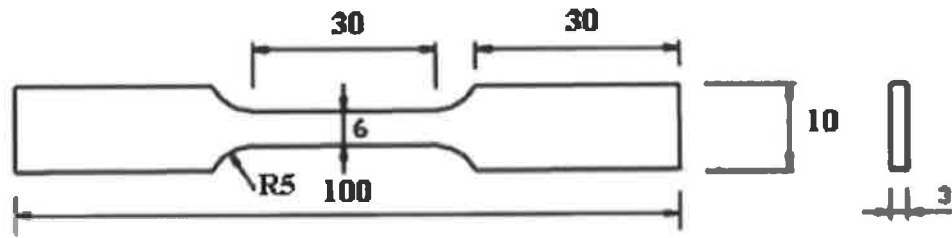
Schematic diagram showing the dimensions of the standard subsize tensile specimen [169].
